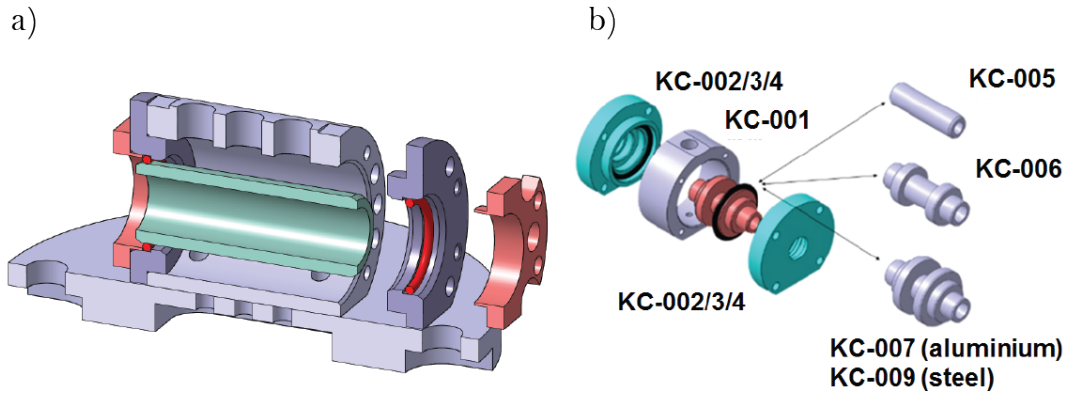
a) Cut view of ORI1 test section; b) ORI2 test section
